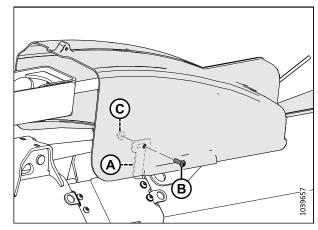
Left Outboard Linkage Cover – View from Front of Header
